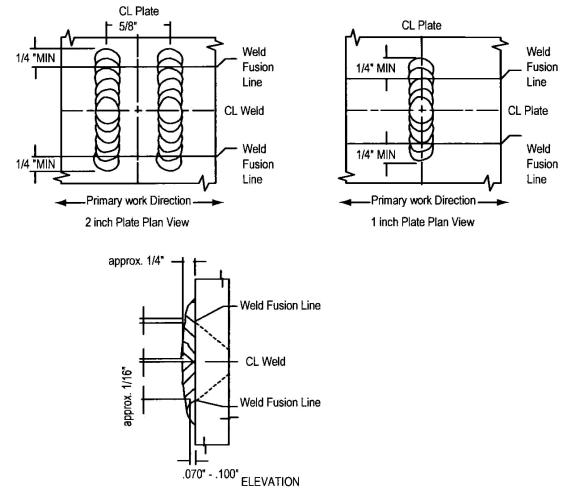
Crack starter bead configuration for weld metal and weld procedure evaluation
